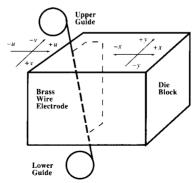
Wire Type EDM Machines Are Used to Cut Stamping Die Profiles.
